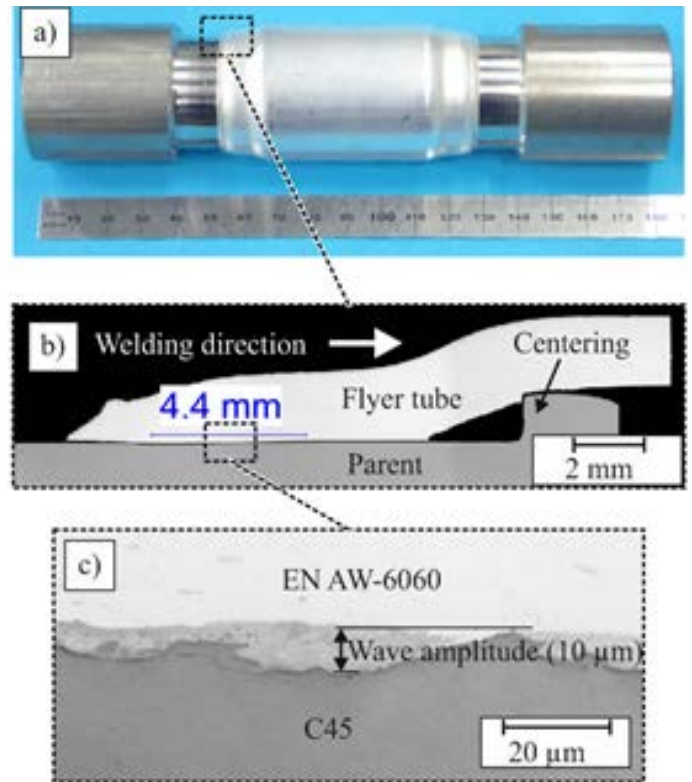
a) MPW-joint between aluminum and steel, b) polished cross section of the welded zone with 4.4 mm weld length, c) wavy interface between aluminum and steel (according to [4])
